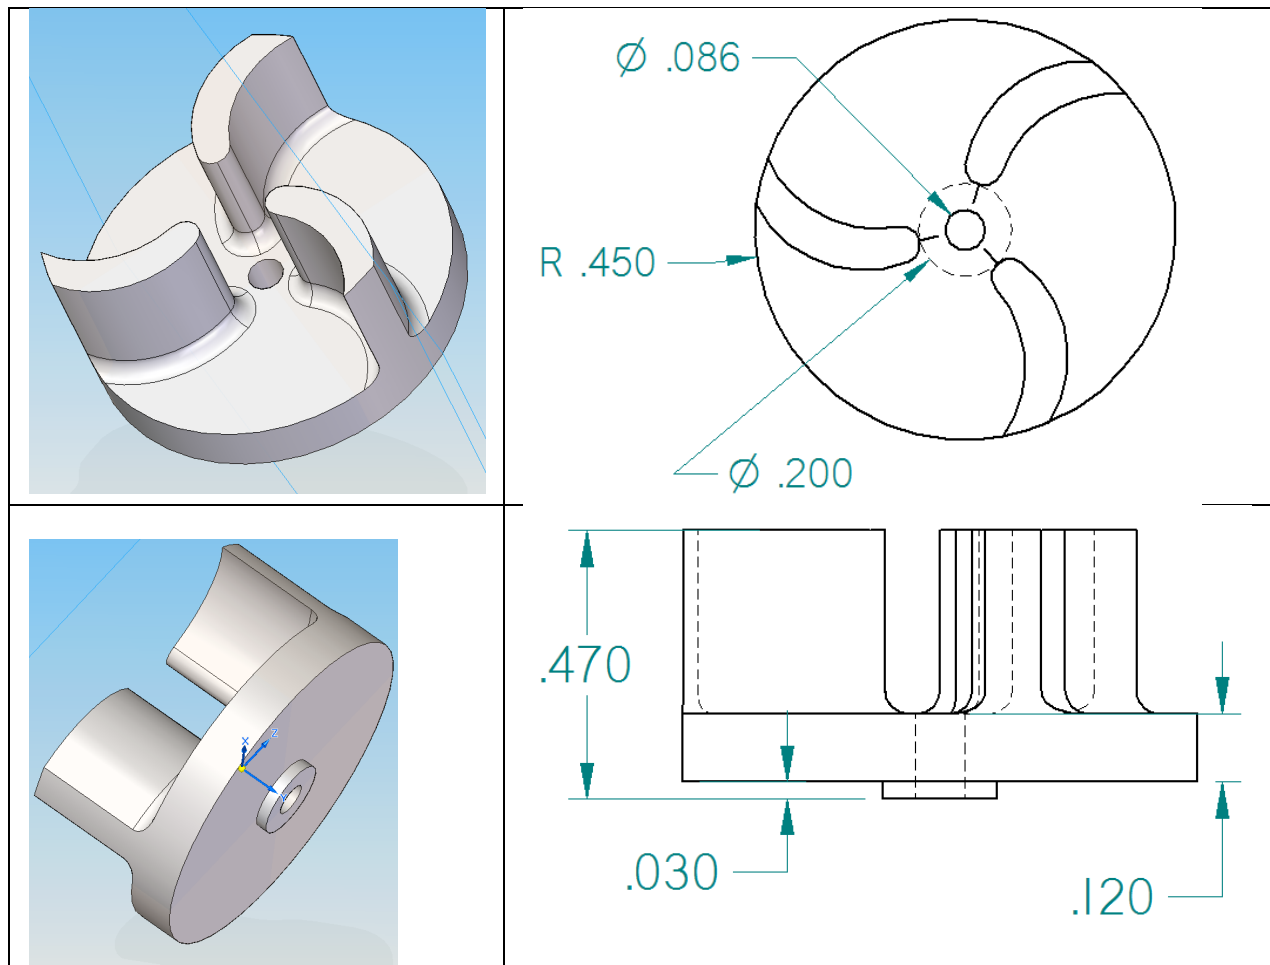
Drawings of impeller to be drawing for centrifugal pump.
